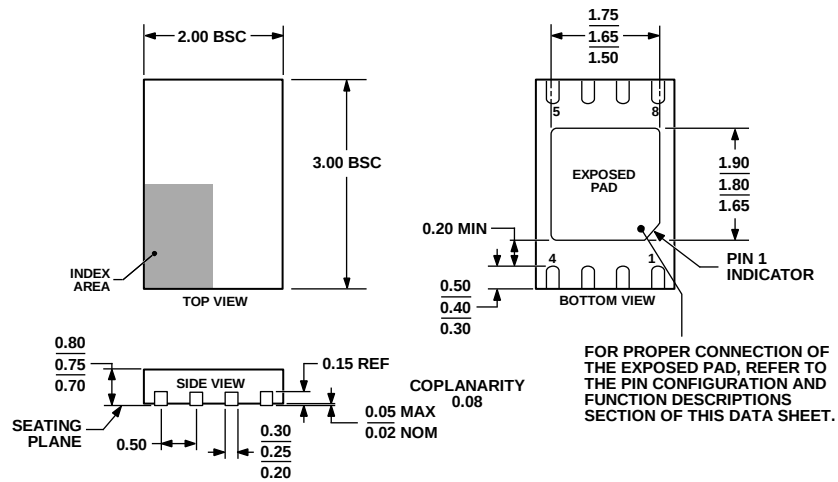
8-Lead Lead Frame Chip Scale Package [LFCSP\_WD]
